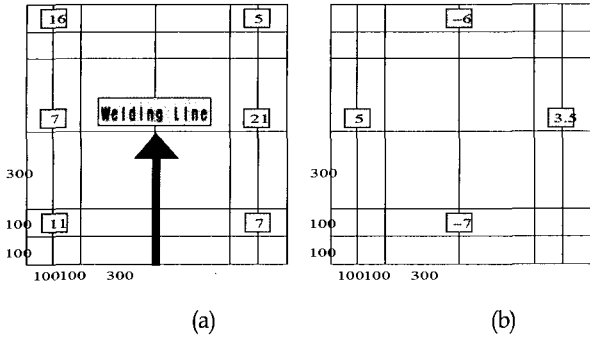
Angular distortion of experimental model, in mm. (a) front side 1 layer-welded specimen, (b) back side 1 & 2 layer-welded specimen.
